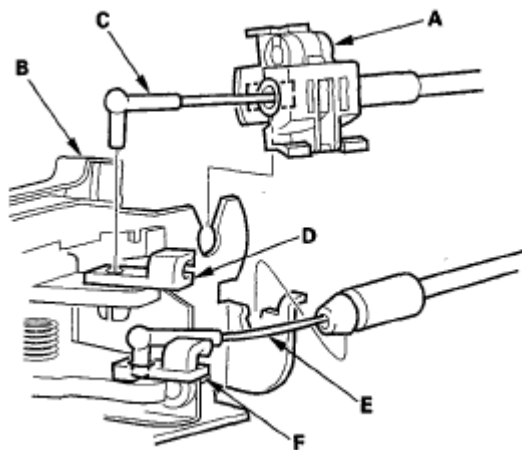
Identifying Latch Cable Fastener, Inner Handle, Latch Cable And Cable Fastener
